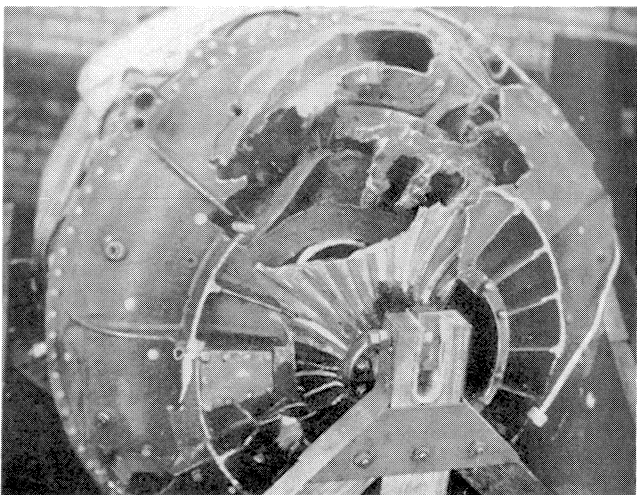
Impeller Failure of One of Whittle's Early Jet Engines. (Meher-Homji, 1997)
